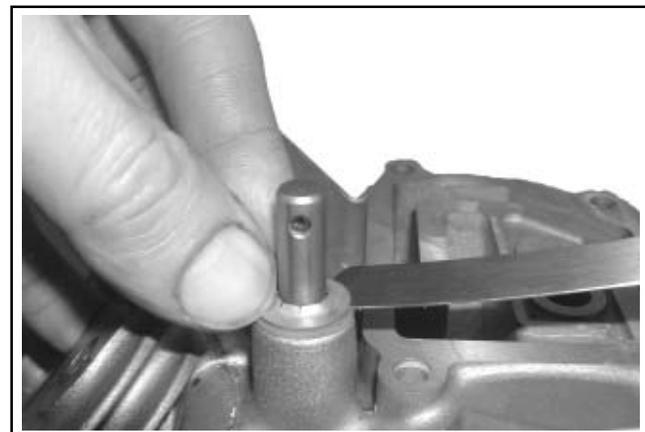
Setting Governor Cross Shaft End Play (8 mm Shaft).
